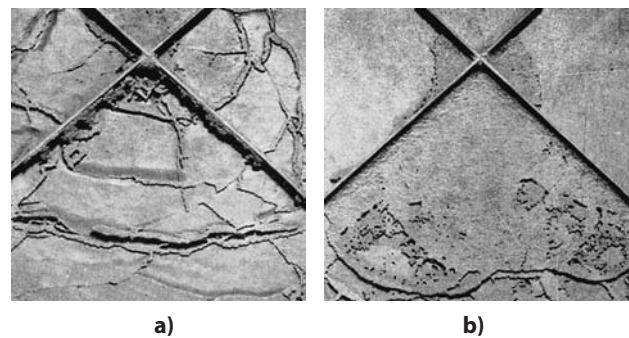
Casting defect: a) Scab (wedged) b) Scab (free) [2]
